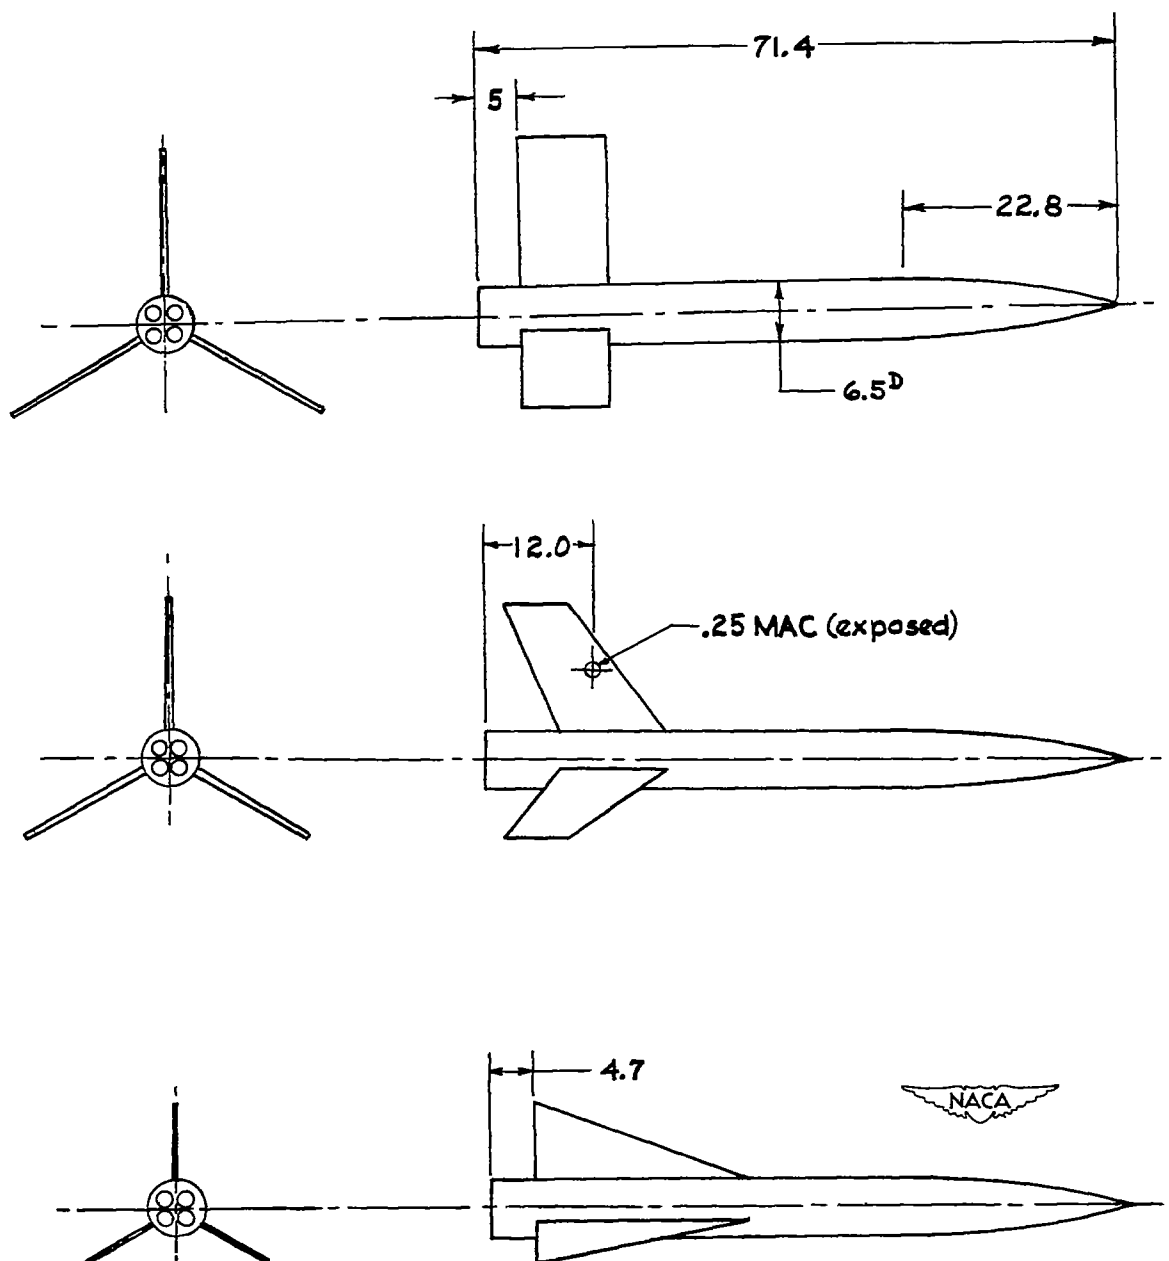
Typical rocket-model shape for measuring damping in roll by the torque-nozzle technique. All dimensions are in inches.
